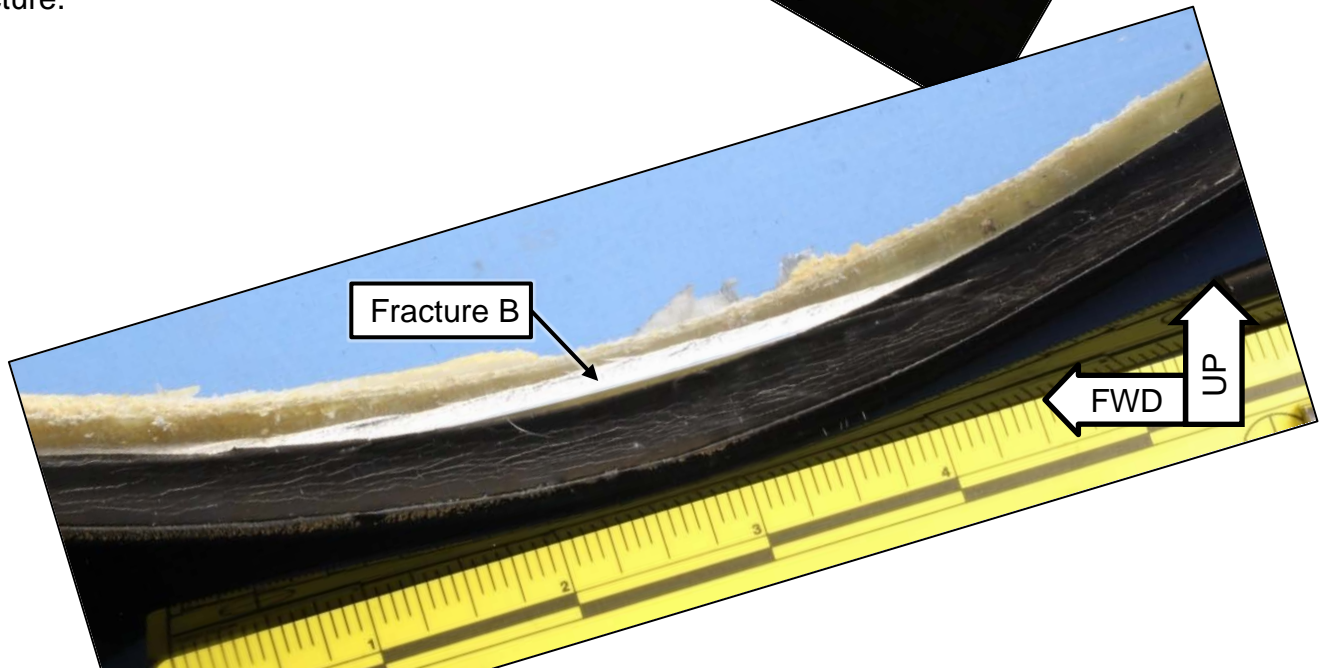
Close view of the left side of the windshield showing fracture B in the windshield next to the window frame.
